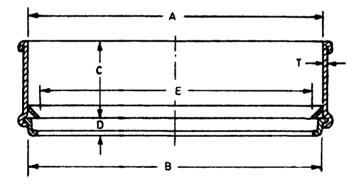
DIMENSIONS OF FRAME FOR TEST SIEVE
